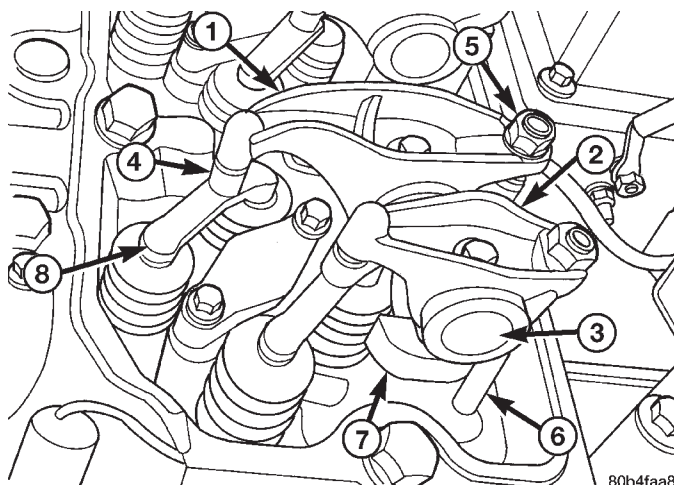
Valve IdentificationCAMSHAFT AND TAPPETS
